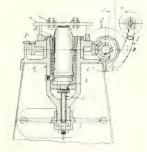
SPECIAL APPARATUS FOR SCREWING IN BRASS SOCKETS
